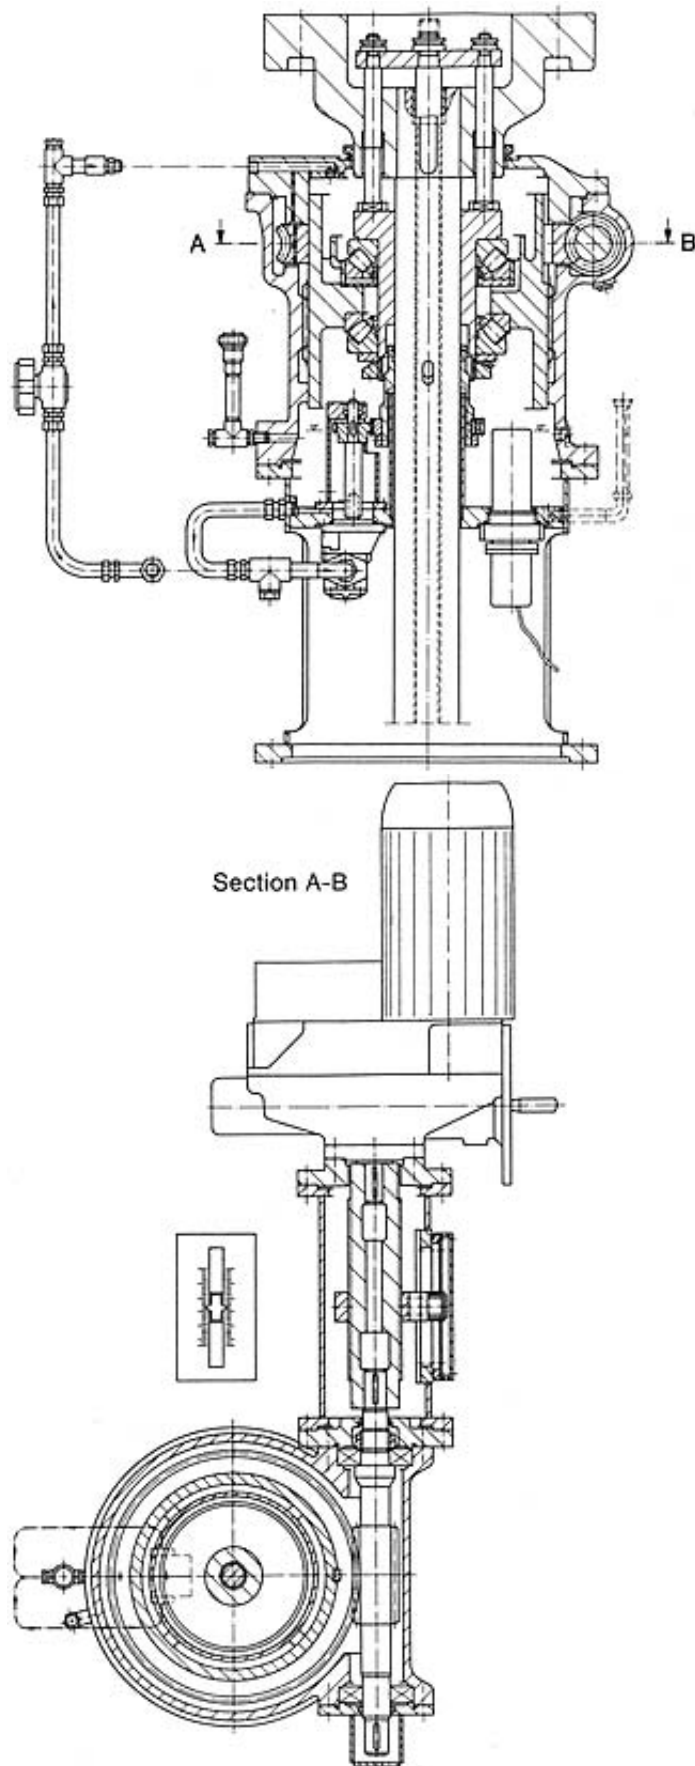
Actuating gear for adjustment rod fitted inside the pump shaft
